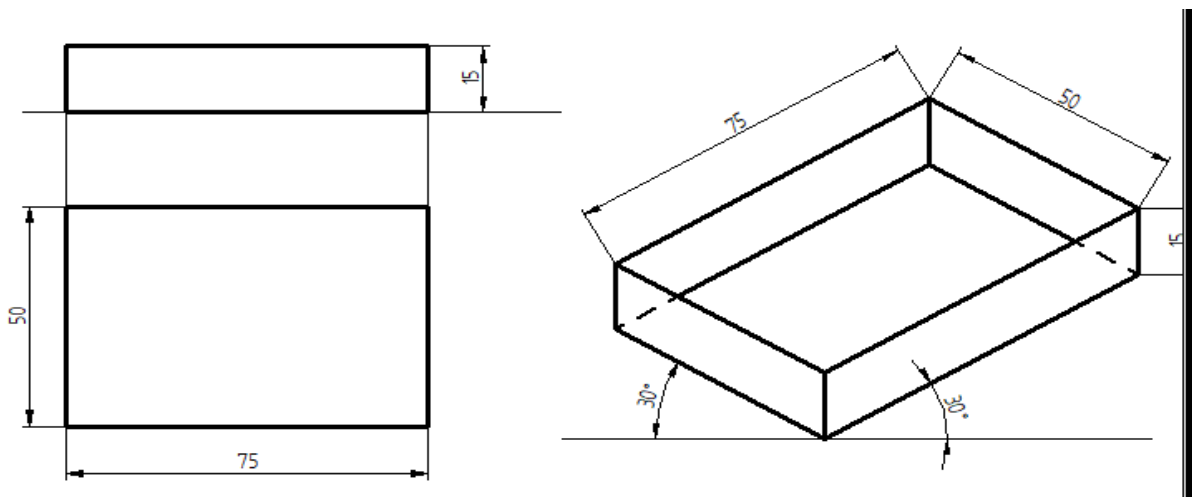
(a) 2D (b) 3D Drawing of tray
